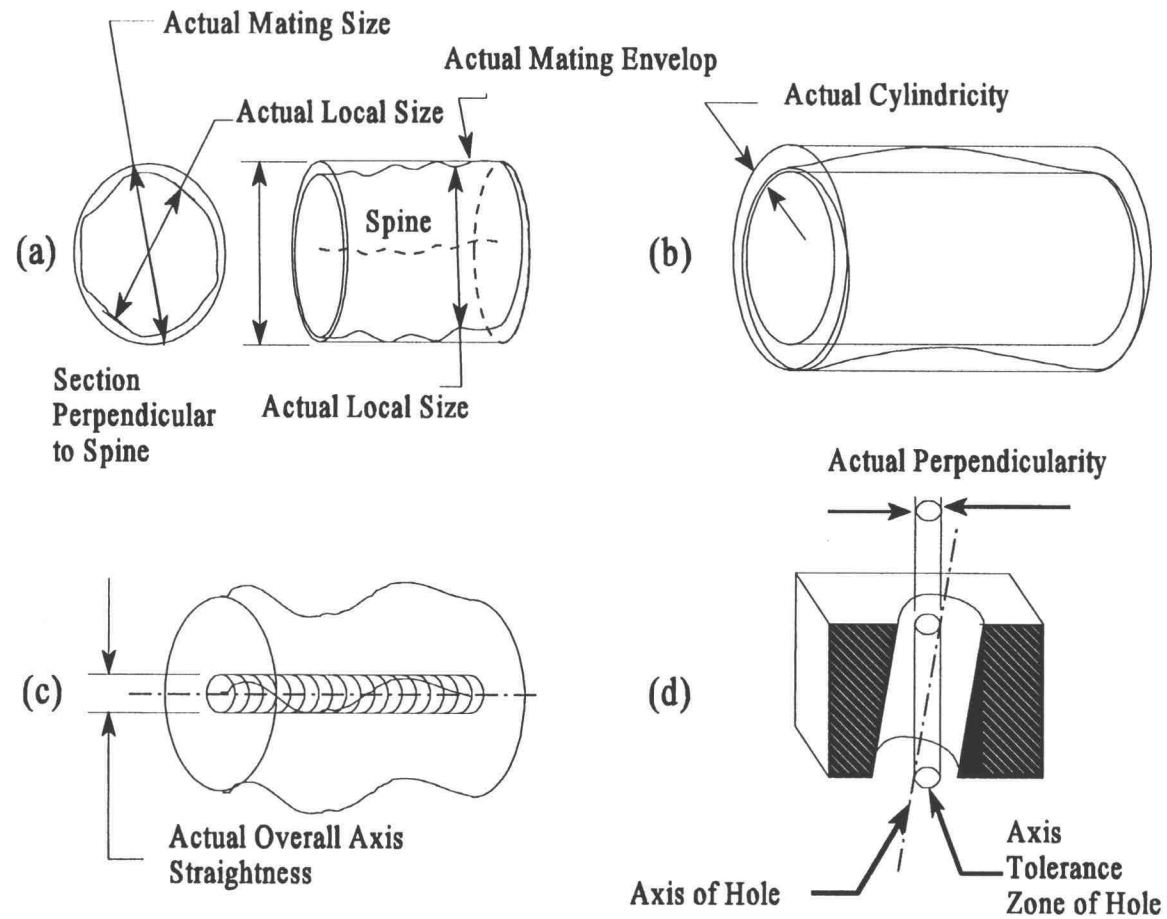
Actual measurements of tolerance zones defined for hole quality: (a) actual size, (b) actual cylindricity, (c) actual overall axis straightness, and (d) actual perpendicularity.
